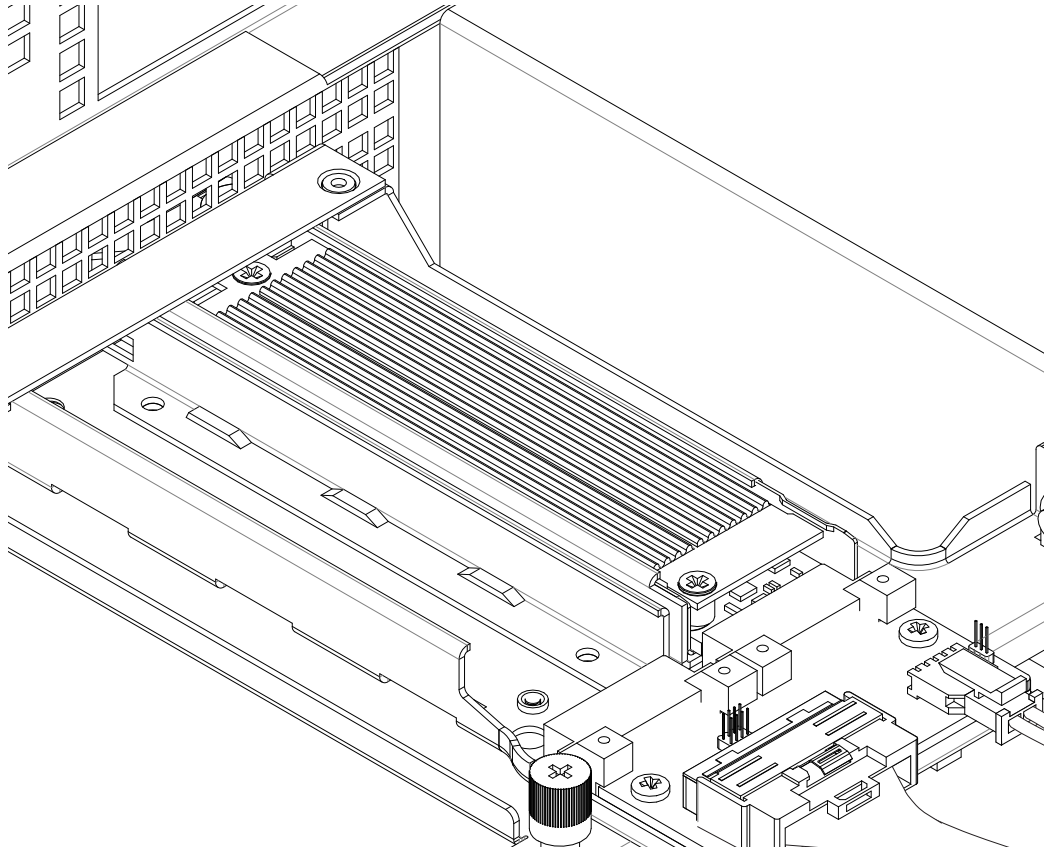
M.2 Adapter Tray Assembly In the Holder Bracket
